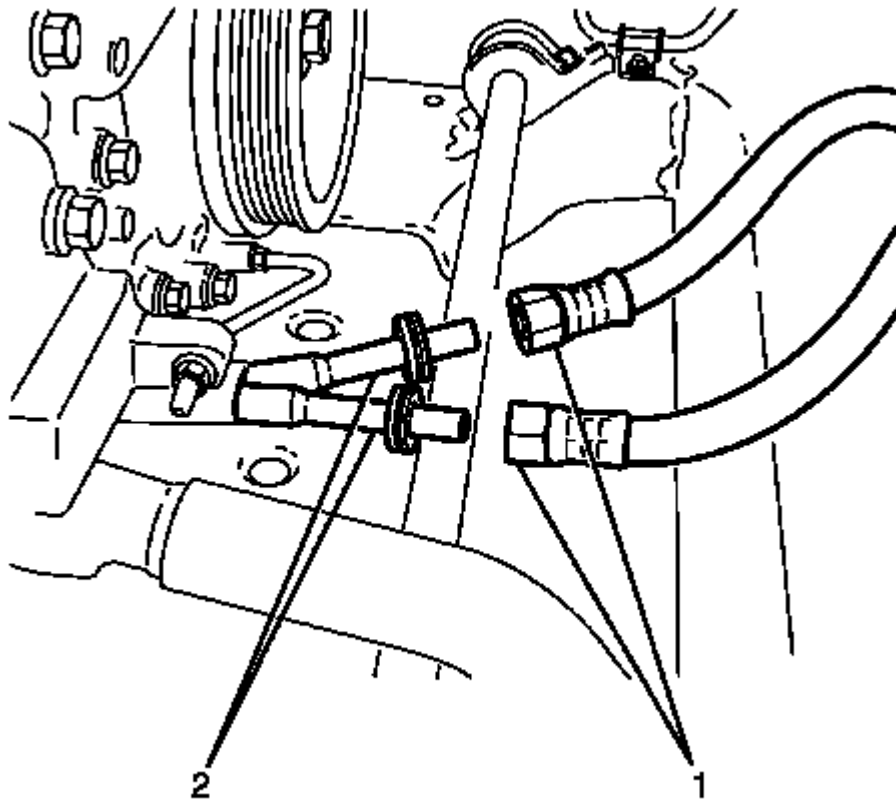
Identifying Transmission Cooler Lines & Flexible Hoses
